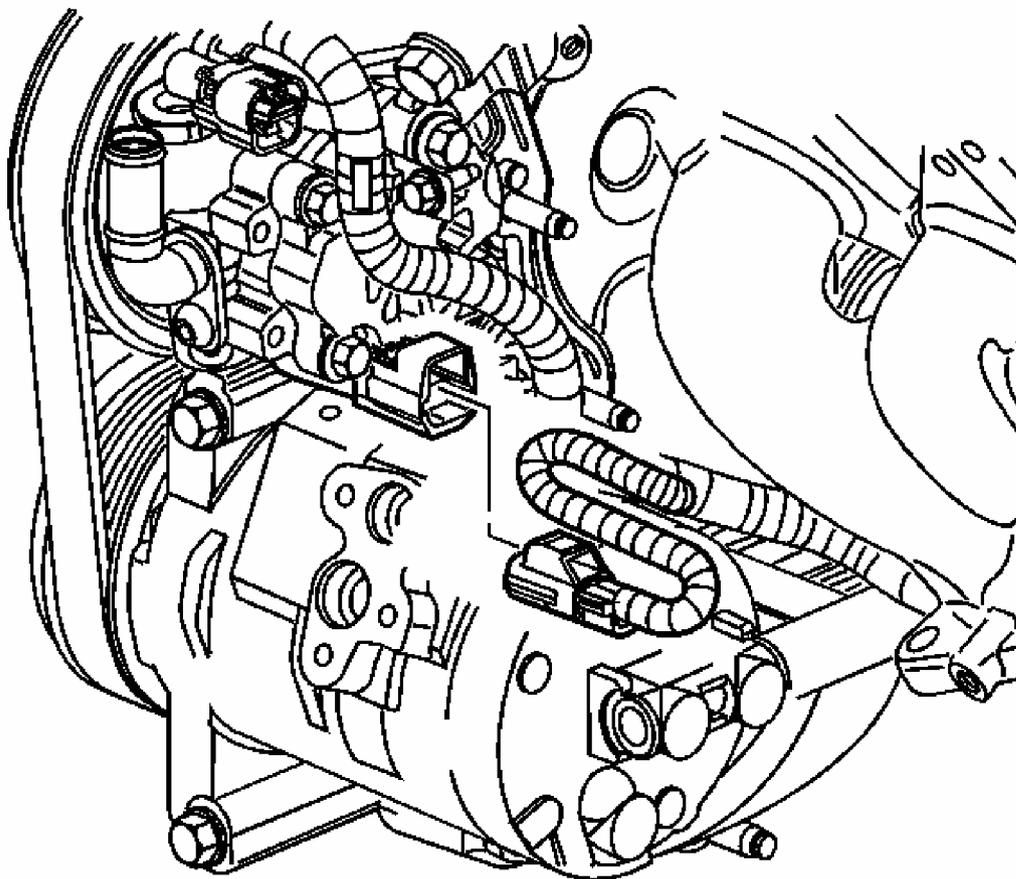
View Of Left Ignition Coils Wiring Harness Connectors
